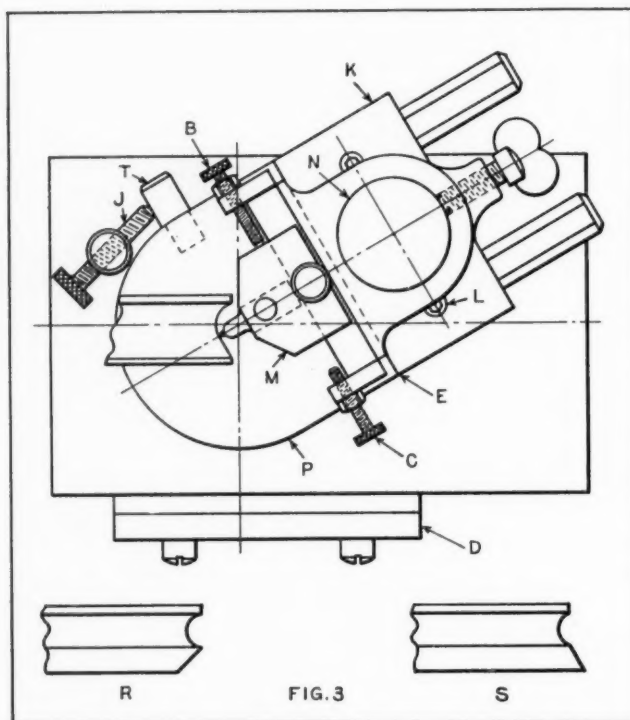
Device Employed in Truing a Wheel for Grinding Form in which Angle Blends with Radius
